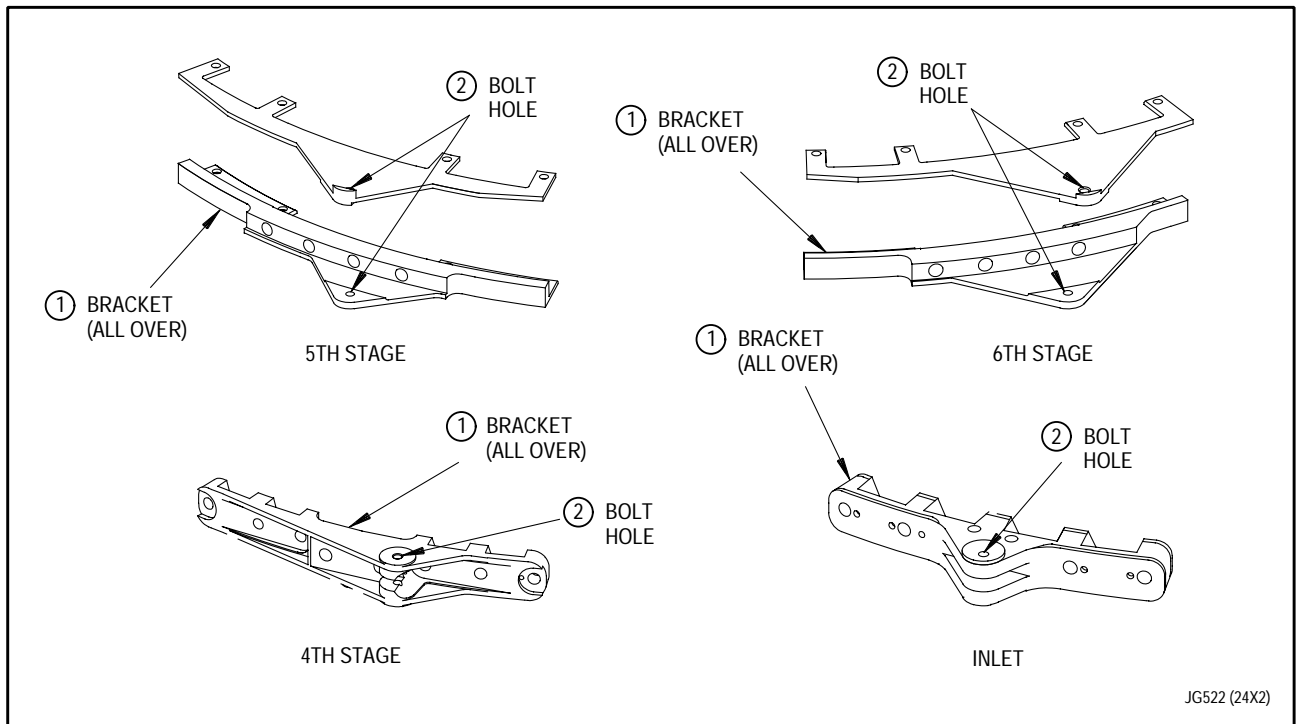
A. Rear Compressor Stator Linkage Arm Bracket Assembly (Fixed 6th Stage Vanes) - Inspection
